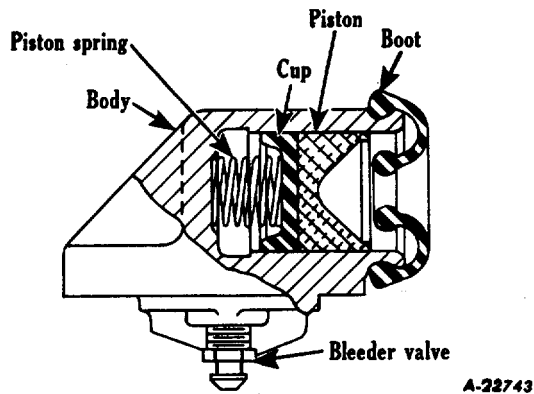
Typical Wheel Cylinder (Single-Piston Type)
